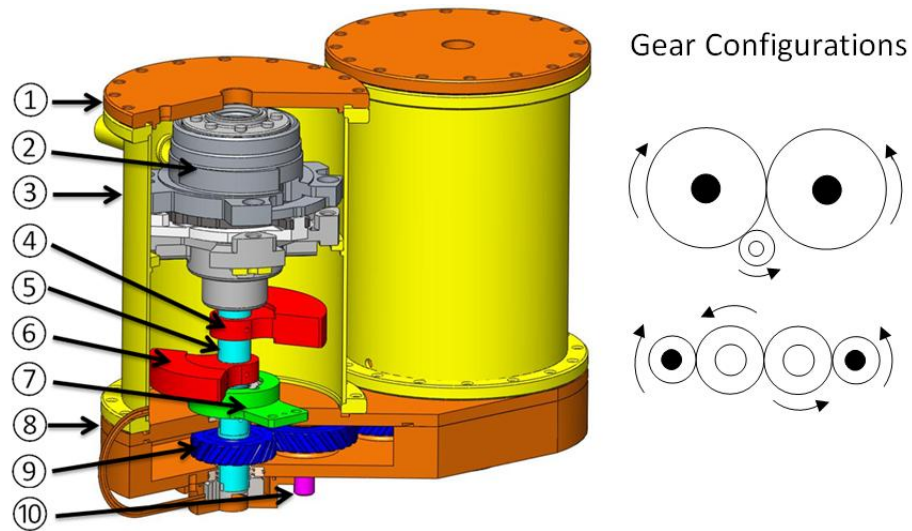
Partial section view of helical gear drive (left). Gear configuration 1 (top-right) and 2 (bottom-right). The gears with the black center are the expander and compressor while the ones with white centers are idlers. The gear configuration of the section view is type 2.
